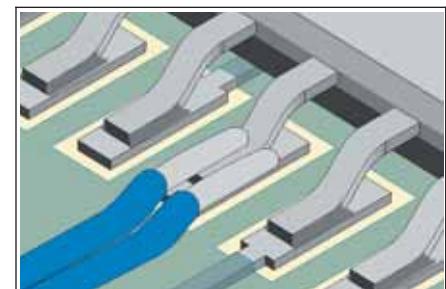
Acceptable Wire looped and soldered to adjacent component leads.
